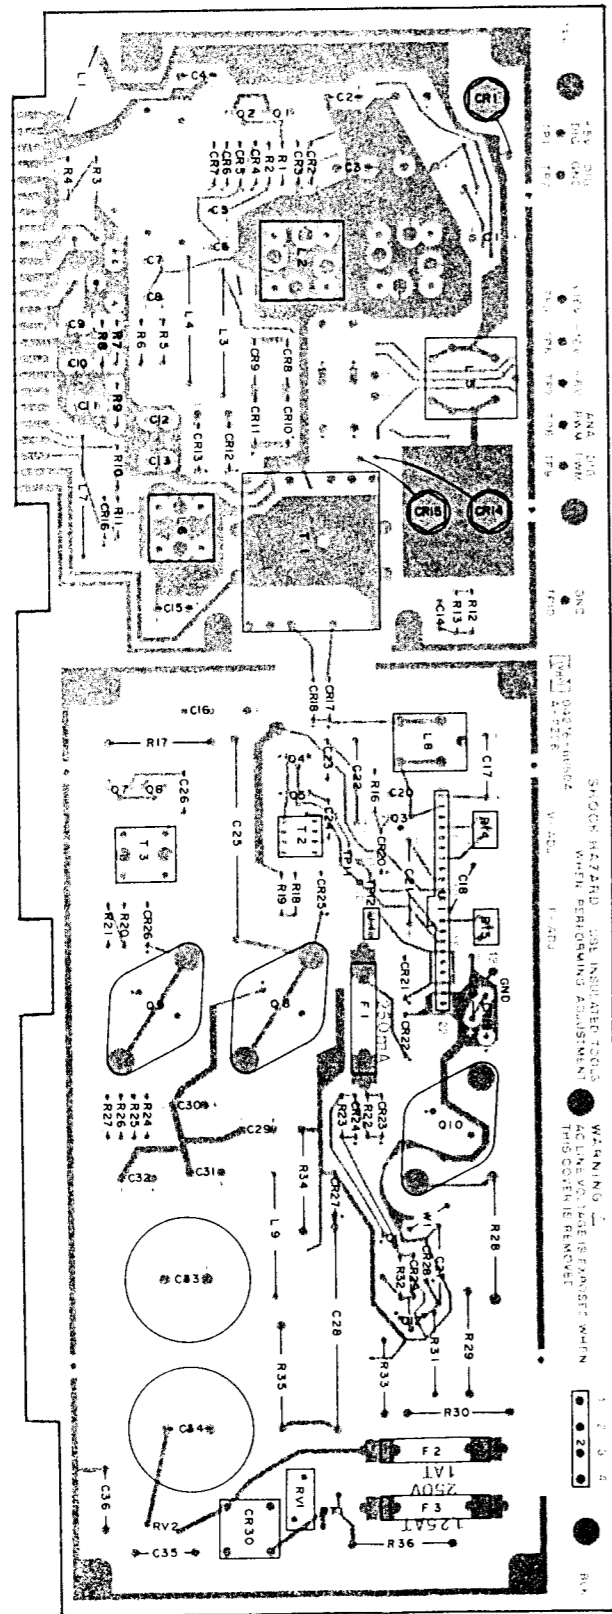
XX. A4 POWER SUPPLY Board Assembly Component Locations.
